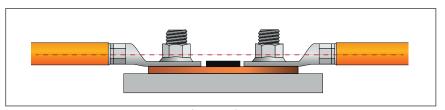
HV BM 1.2, power cables HV- (≤35 mm²), fastening the ring terminals with the nuts
